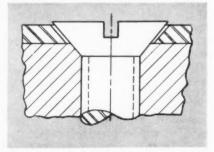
A situation might develop where the screw head bears against the casting but does not bear against the thin piece.
